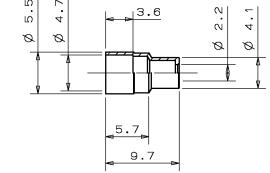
③-2 Crimping Ring (for ø 2 mm cord)
